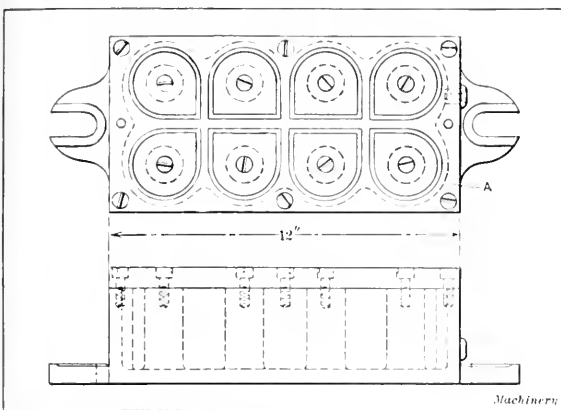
Multipolar Chuck for Use on the Planer or Milling Machine
